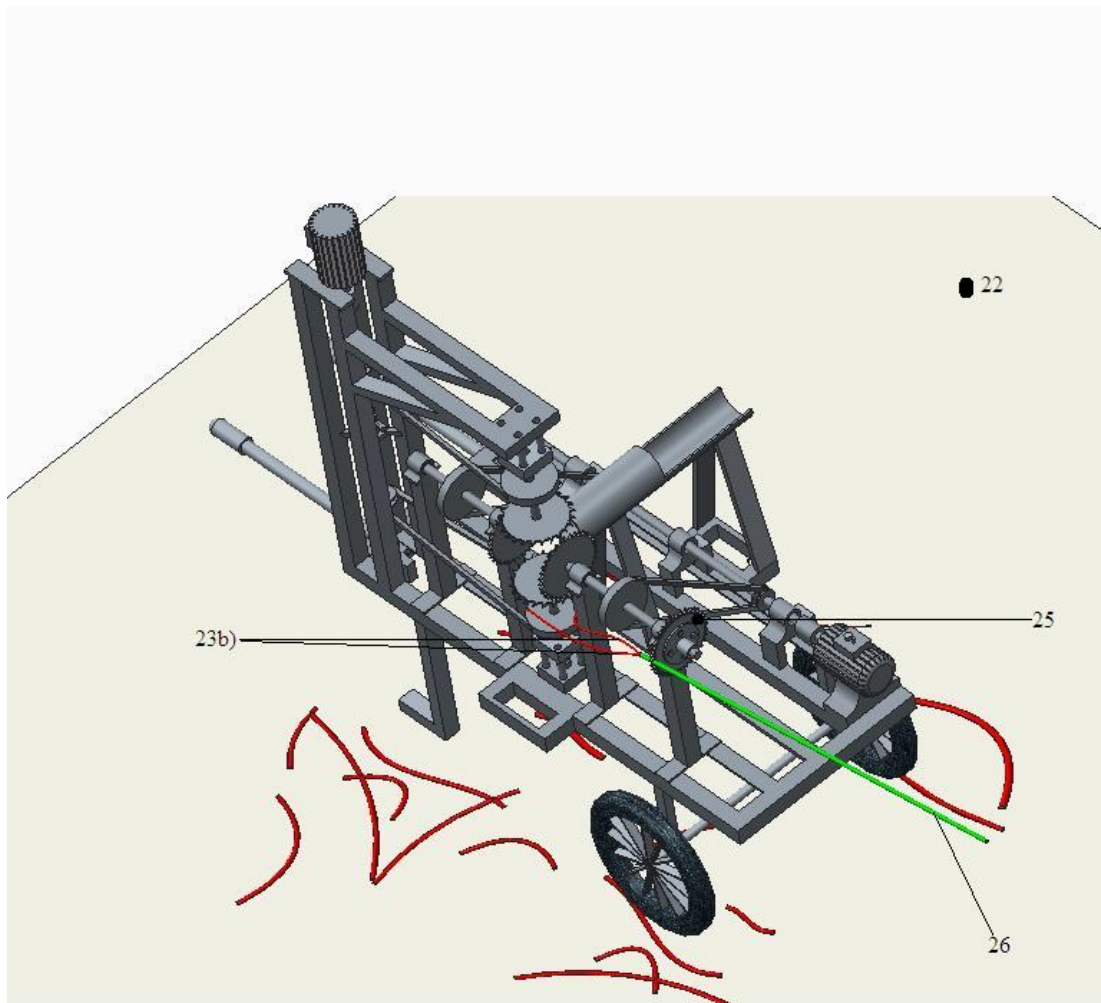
D model of the JBC machine with additional blade placed on the shaft
